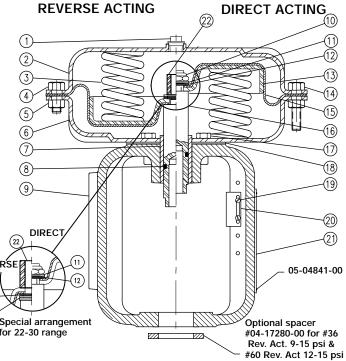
ACTUATOR ASSEMBLY - K1 & K4
